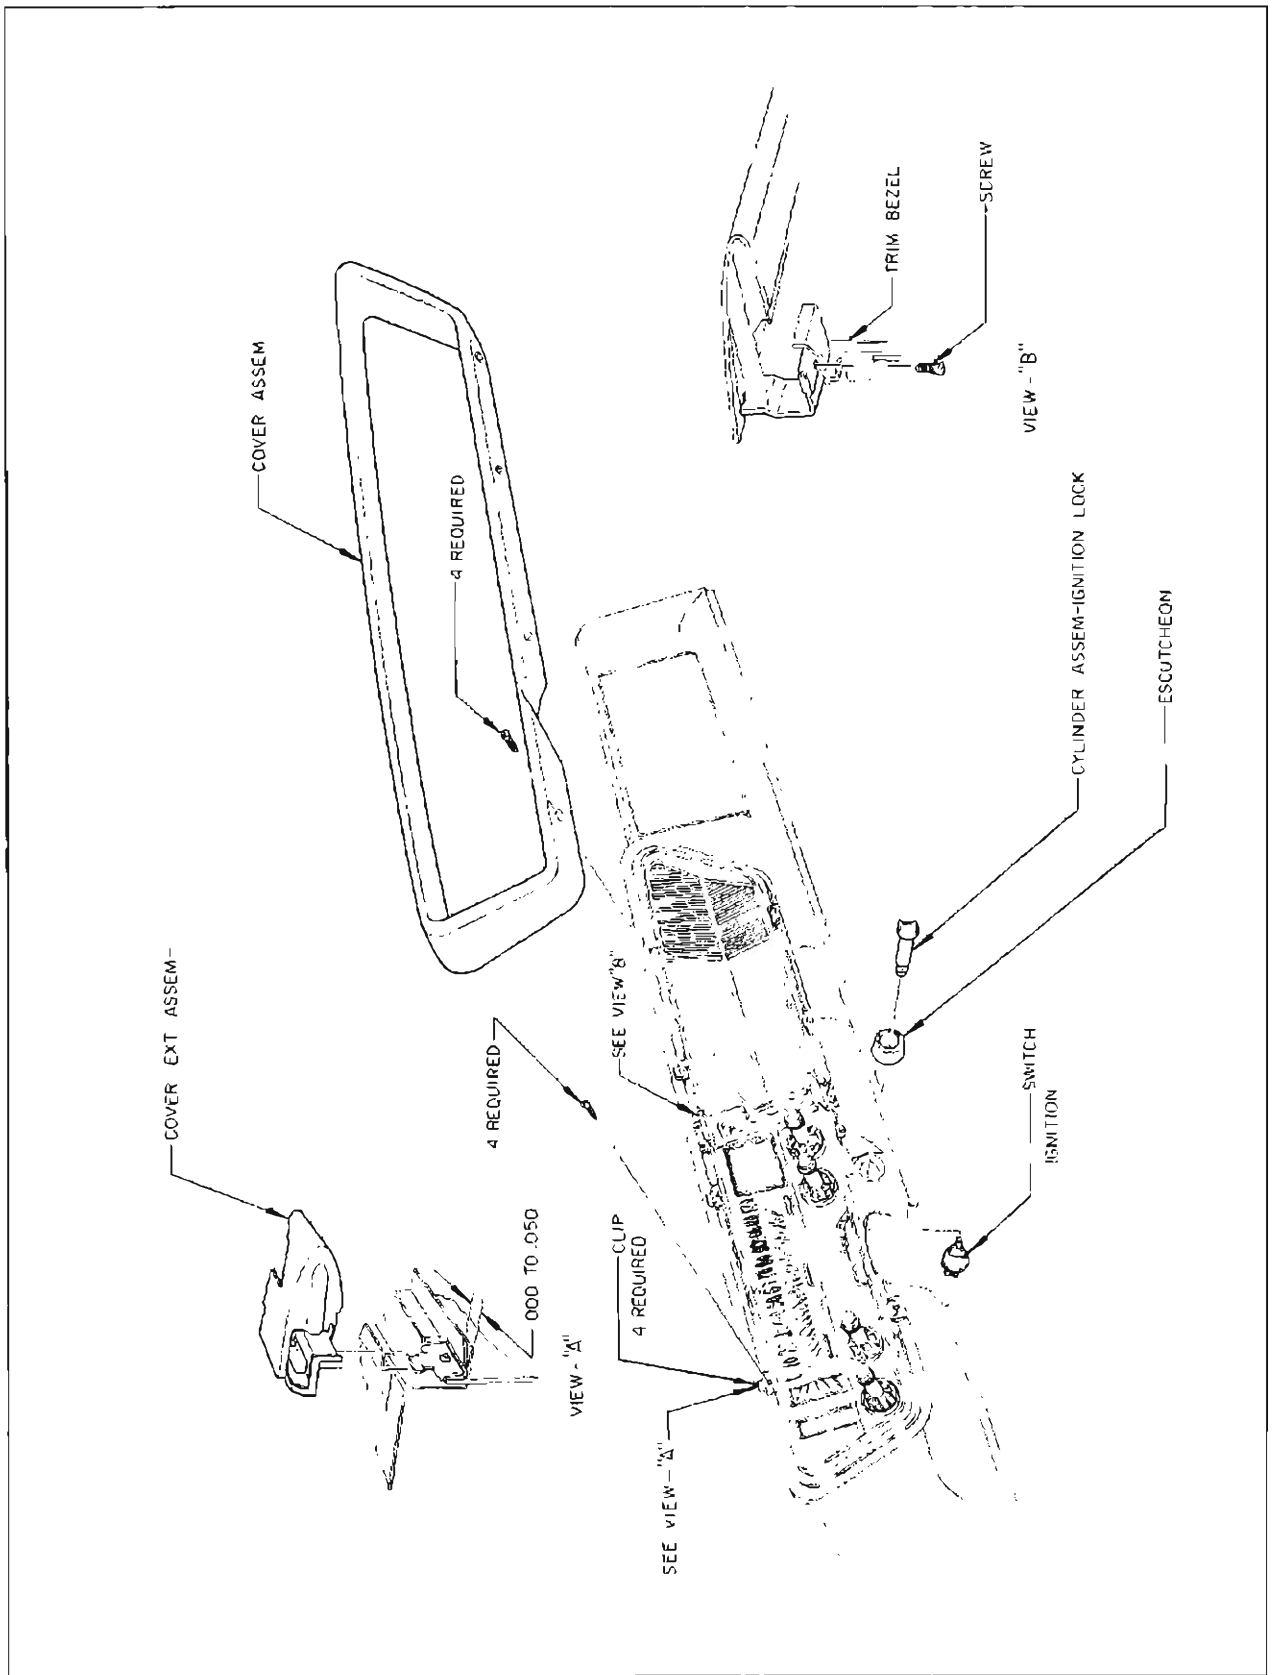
Instrument Panel Cover Extension and Ignition Switch Installation
